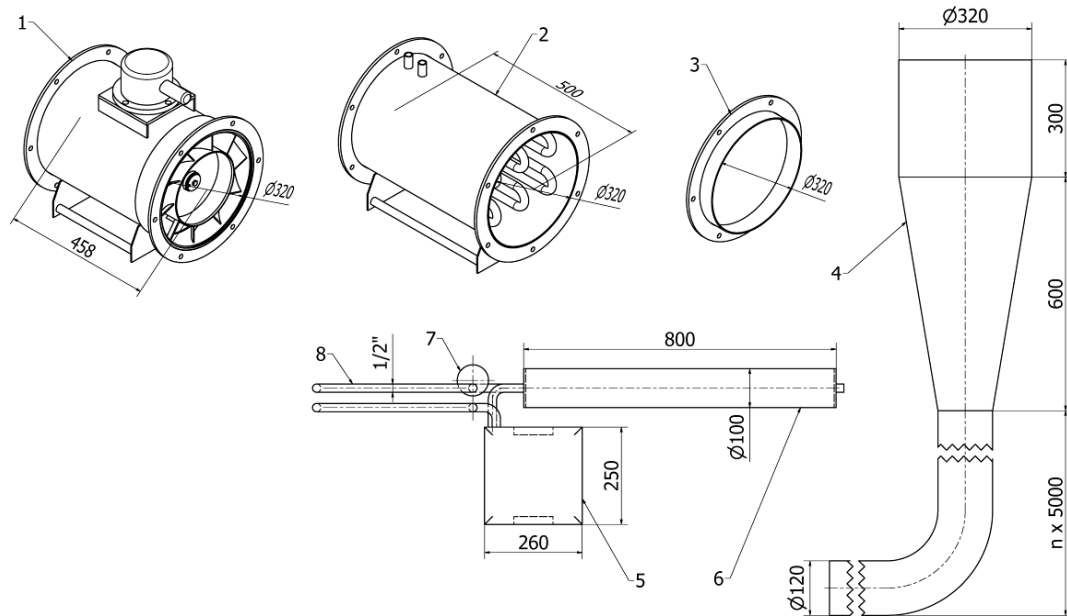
Design of the main components of the air conditioner (1 –fan, 2 –cooler 3 –Flange of elastic hose, 4 –elastic hose , 5 –compressor , 6 –condenser, 7 –expansion valve 8 – elastic tubes)
